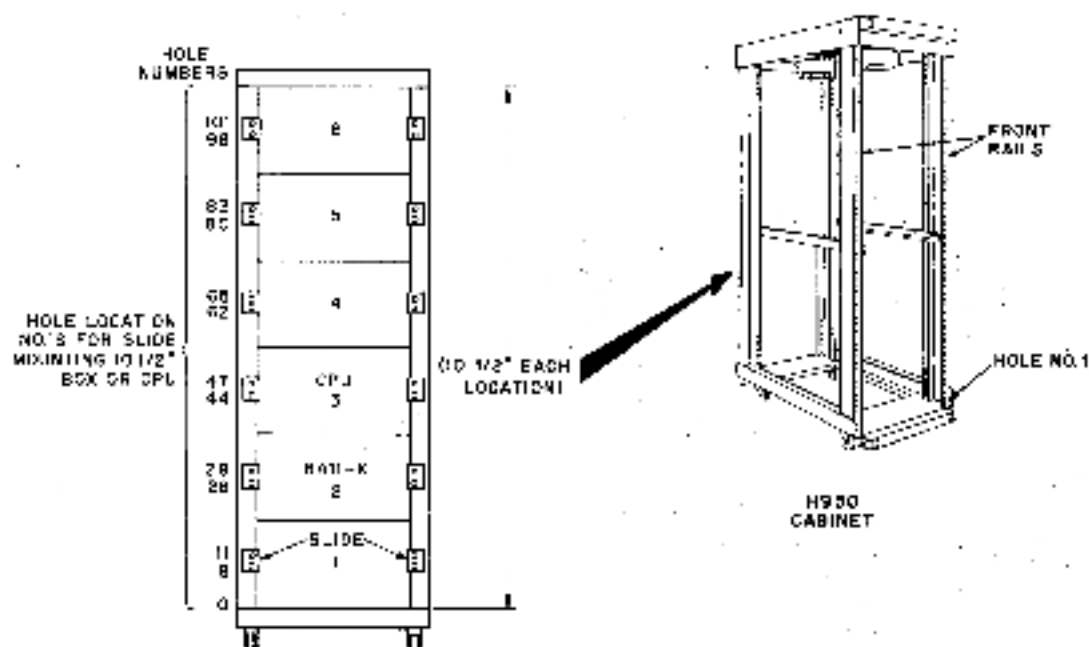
BA11-K and CPU Cabinet Mounting Specification
